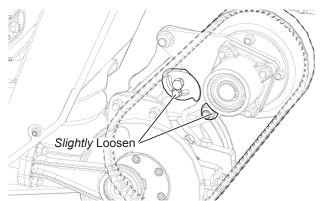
Knife Belt Tension - loosen lock nut and bolt
